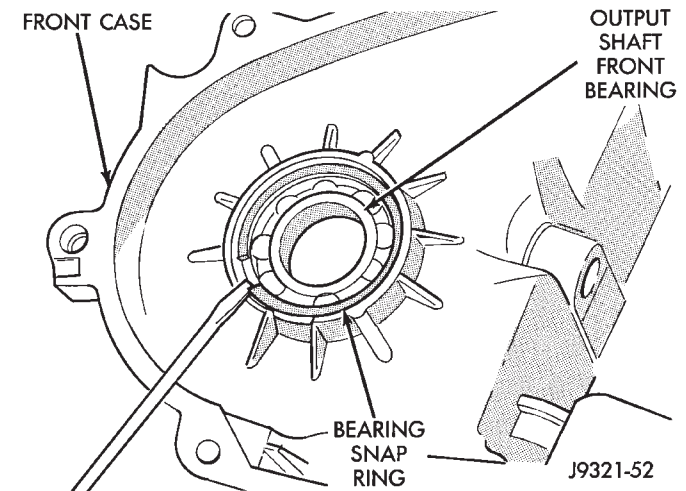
Output Shaft Front Bearing Snap Ring Removal
